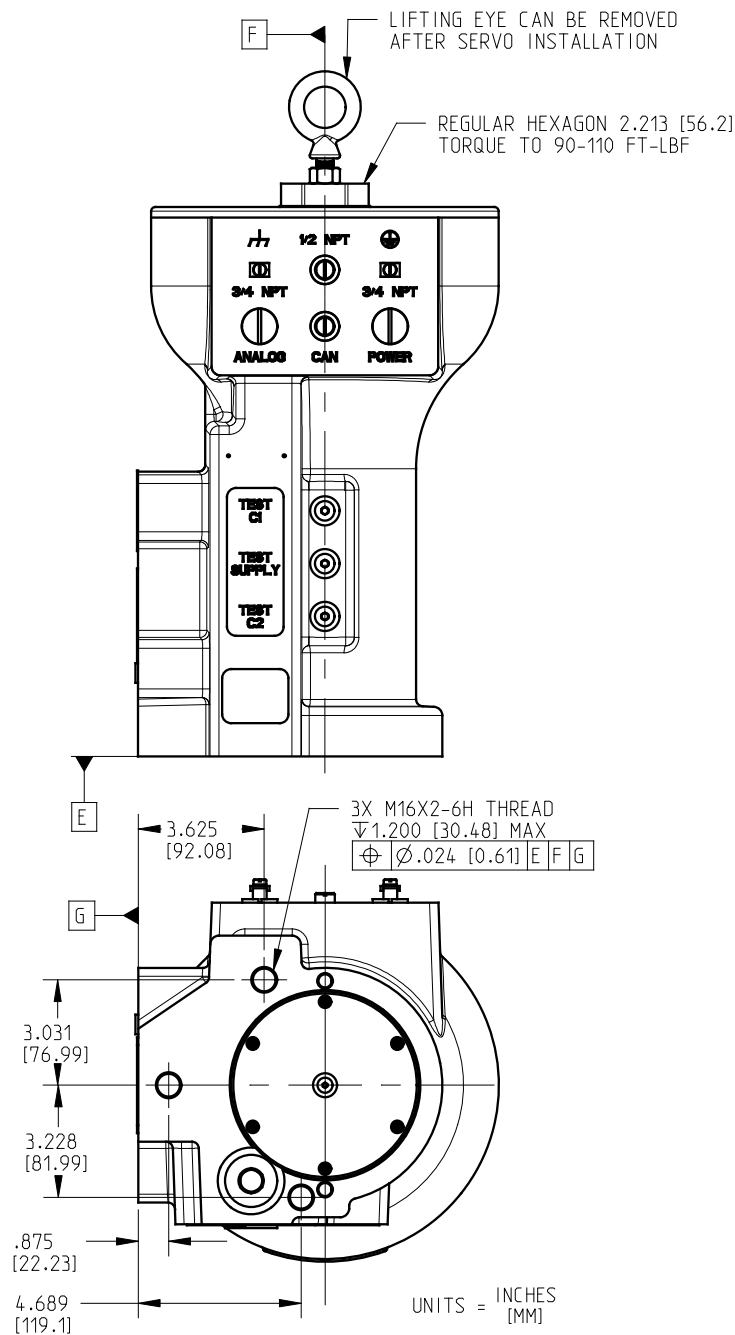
VS-I Remote Servo. Product Installation Interface - Bolting Pattern
